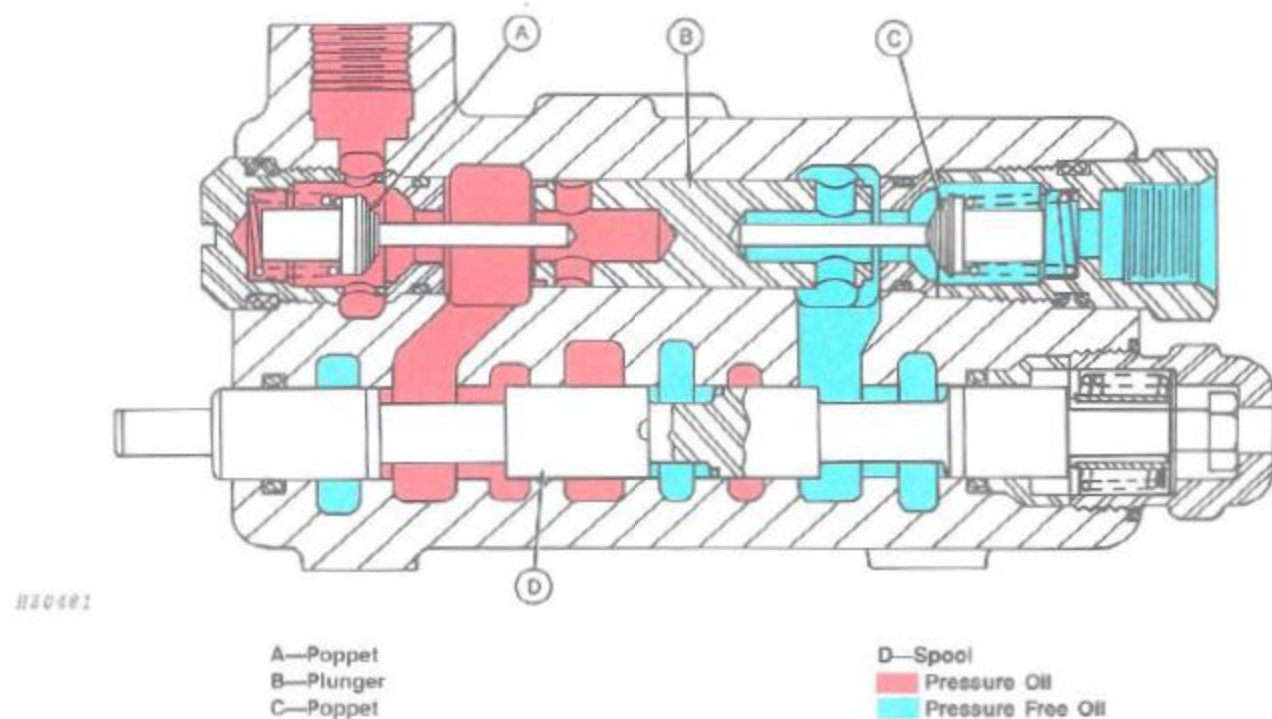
Cross-Section Unloading Auger Swing Control Valve
